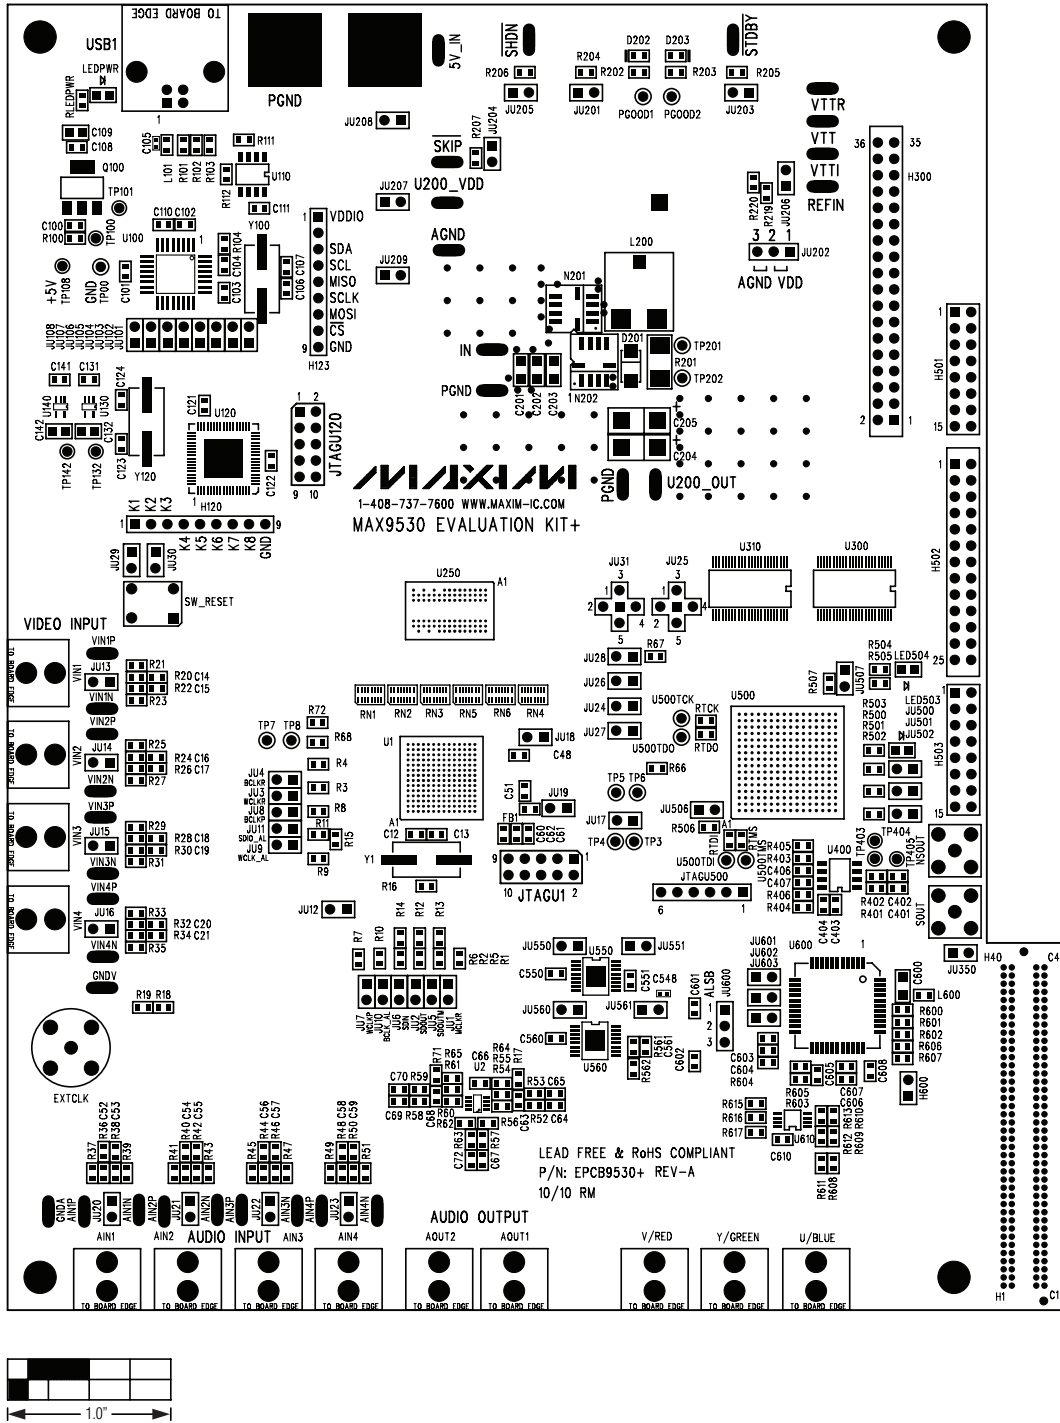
MAX9530 EV Kit Component Placement Guide—Component Side
